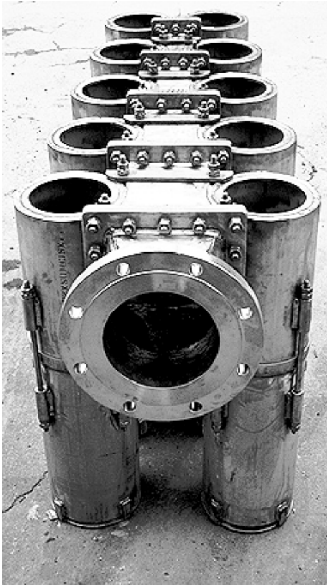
A 10-tube parallel assembly of 'Foam-Free' vortex tubes shown bolted together off a central manifold inlet duct. Courtesy EGS Systems, Inc.
